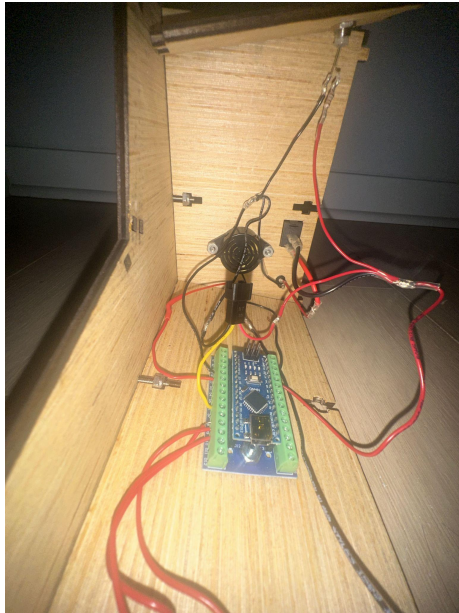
shows the microcontroller board is mounted to the base panel, and preliminary wiring paths are routed toward the rocker switch, buttons, buzzer, and power connections. This stage highlights wire organization practices for minimizing overlap and ensuring traceability, consistent with assembly standards [2], [4]
